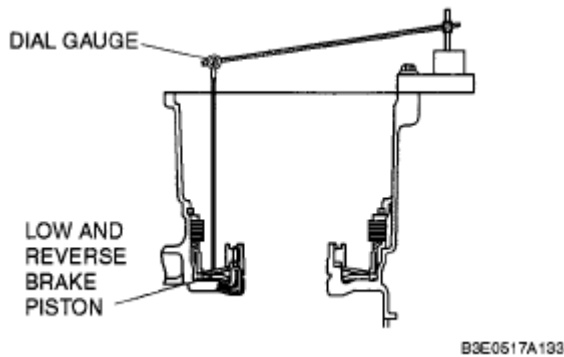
Setting Measuring Point Of Dial Gauge To Low And Reverse Brake Piston
